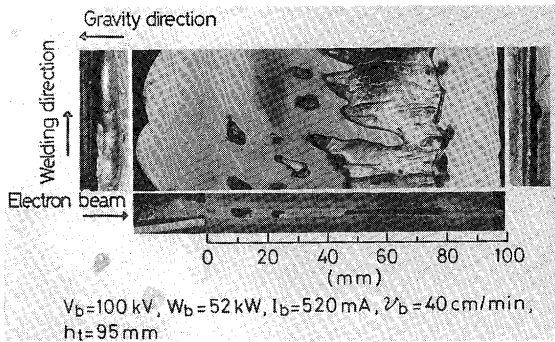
Fully penetrated cross sections and appearance of horizontal position welding.
